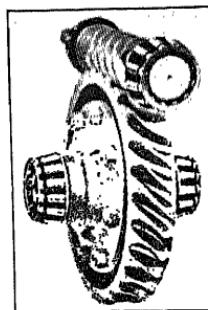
Worm and gear. Timken Bearing Co., Canton, O.
